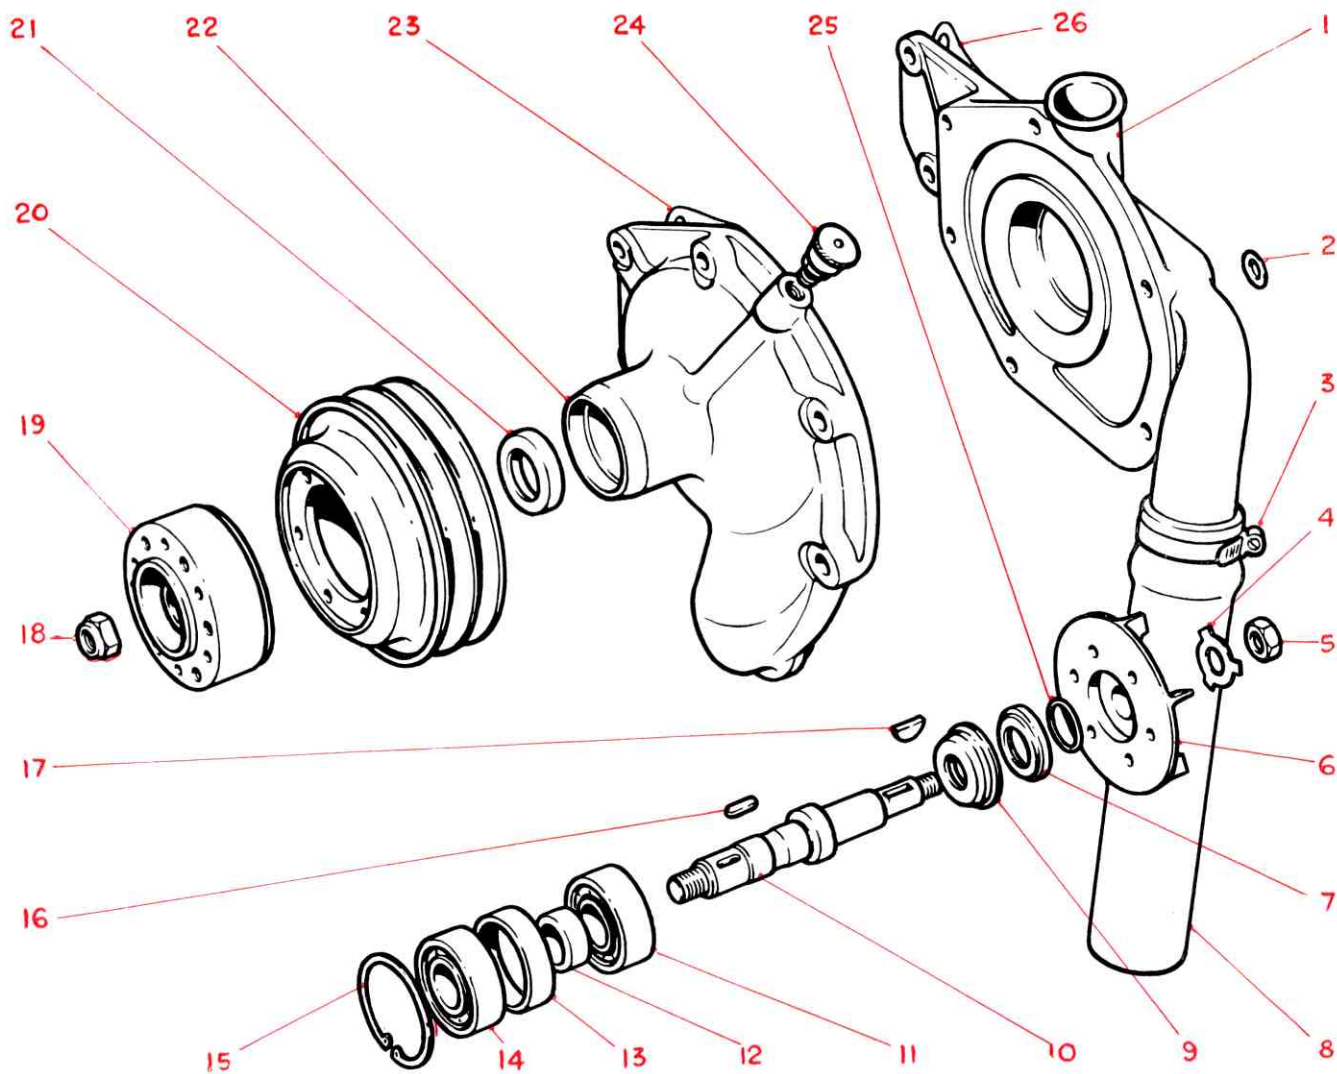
EXPLODED VIEW OF THE WATER PUMP
